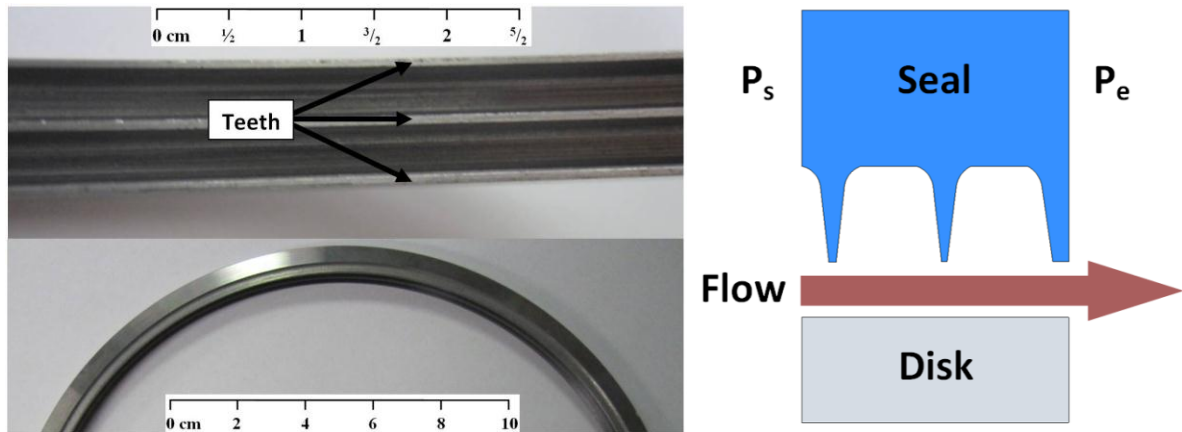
Inner side view of a three teeth labyrinth seal and schematic view of air flow.
